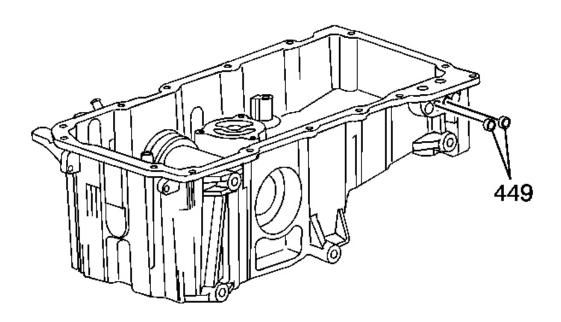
View Of Oil Gallery Plugs Courtesy of GENERAL MOTORS CORP.
